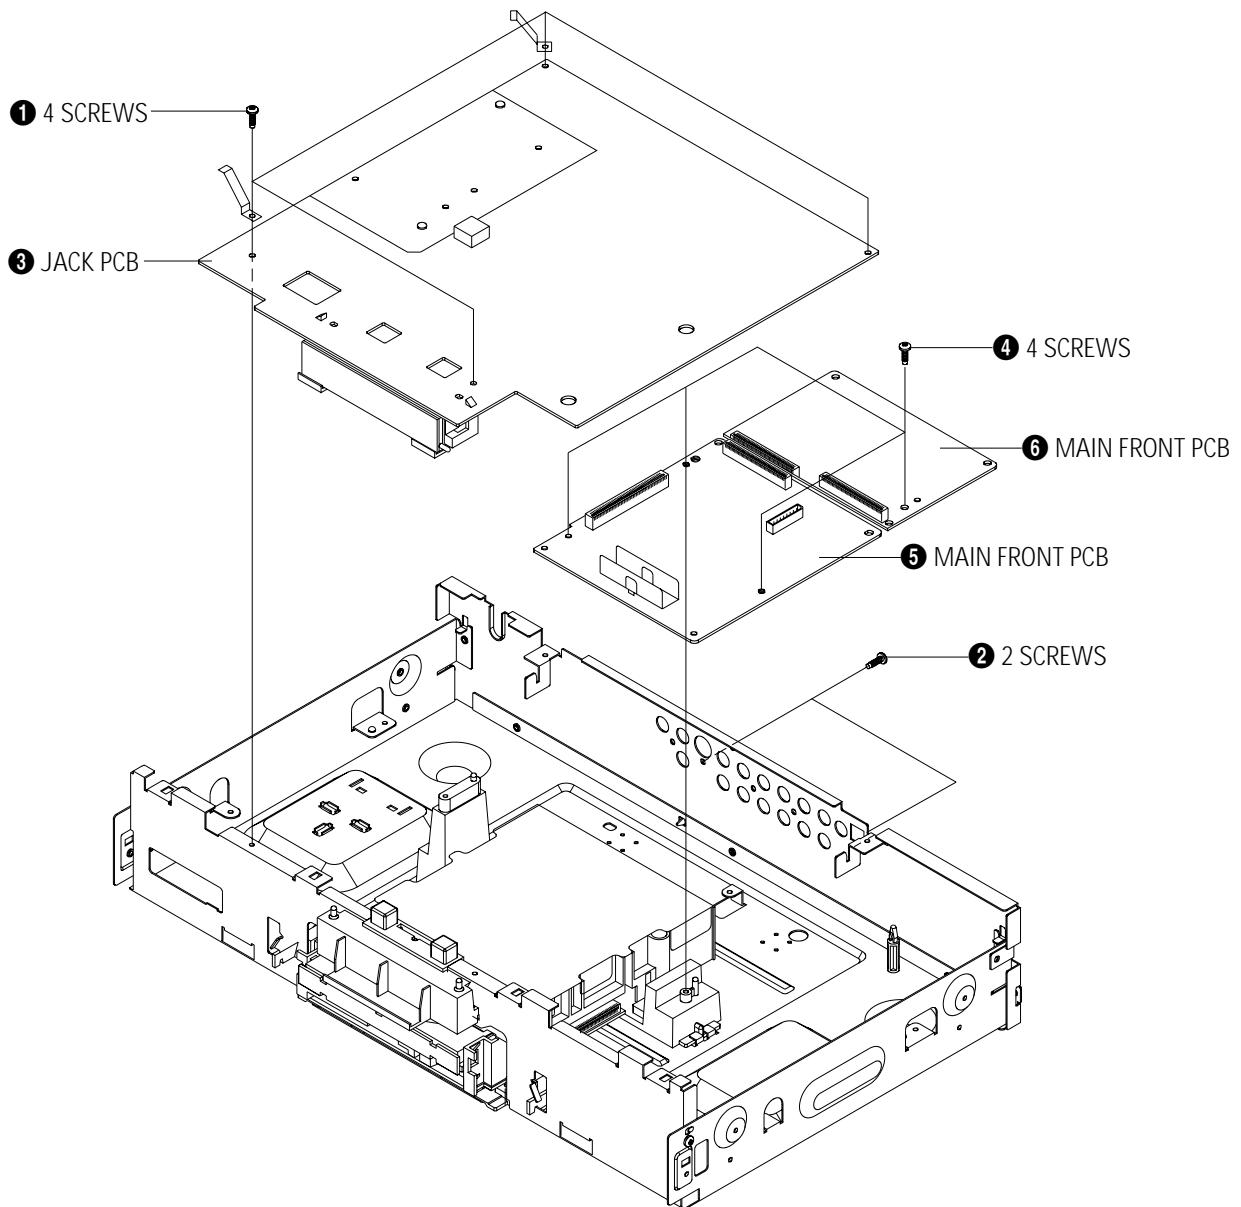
Main Front/Back PCB, Jack PCB Removal
